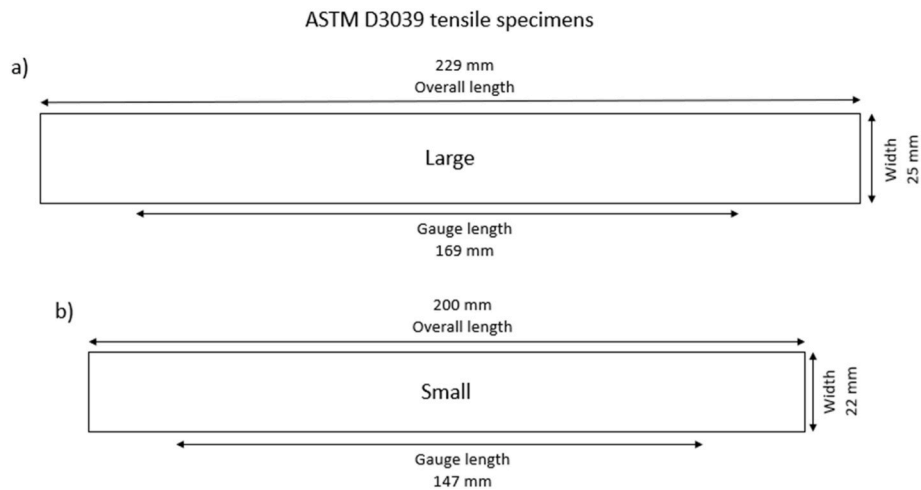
ASTM D3039 tensile test geometry and sizes: (a) Large specimens; and (b) Small specimens.
